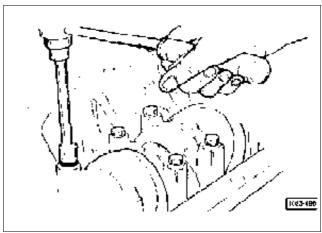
The main and big end bearings securing screw threads should be covered with LOCTITE 242. Thereafter tighten the securing screws using tool no. 5.9030.640.0; following the instructions on pages 32 - 33 - 34;
